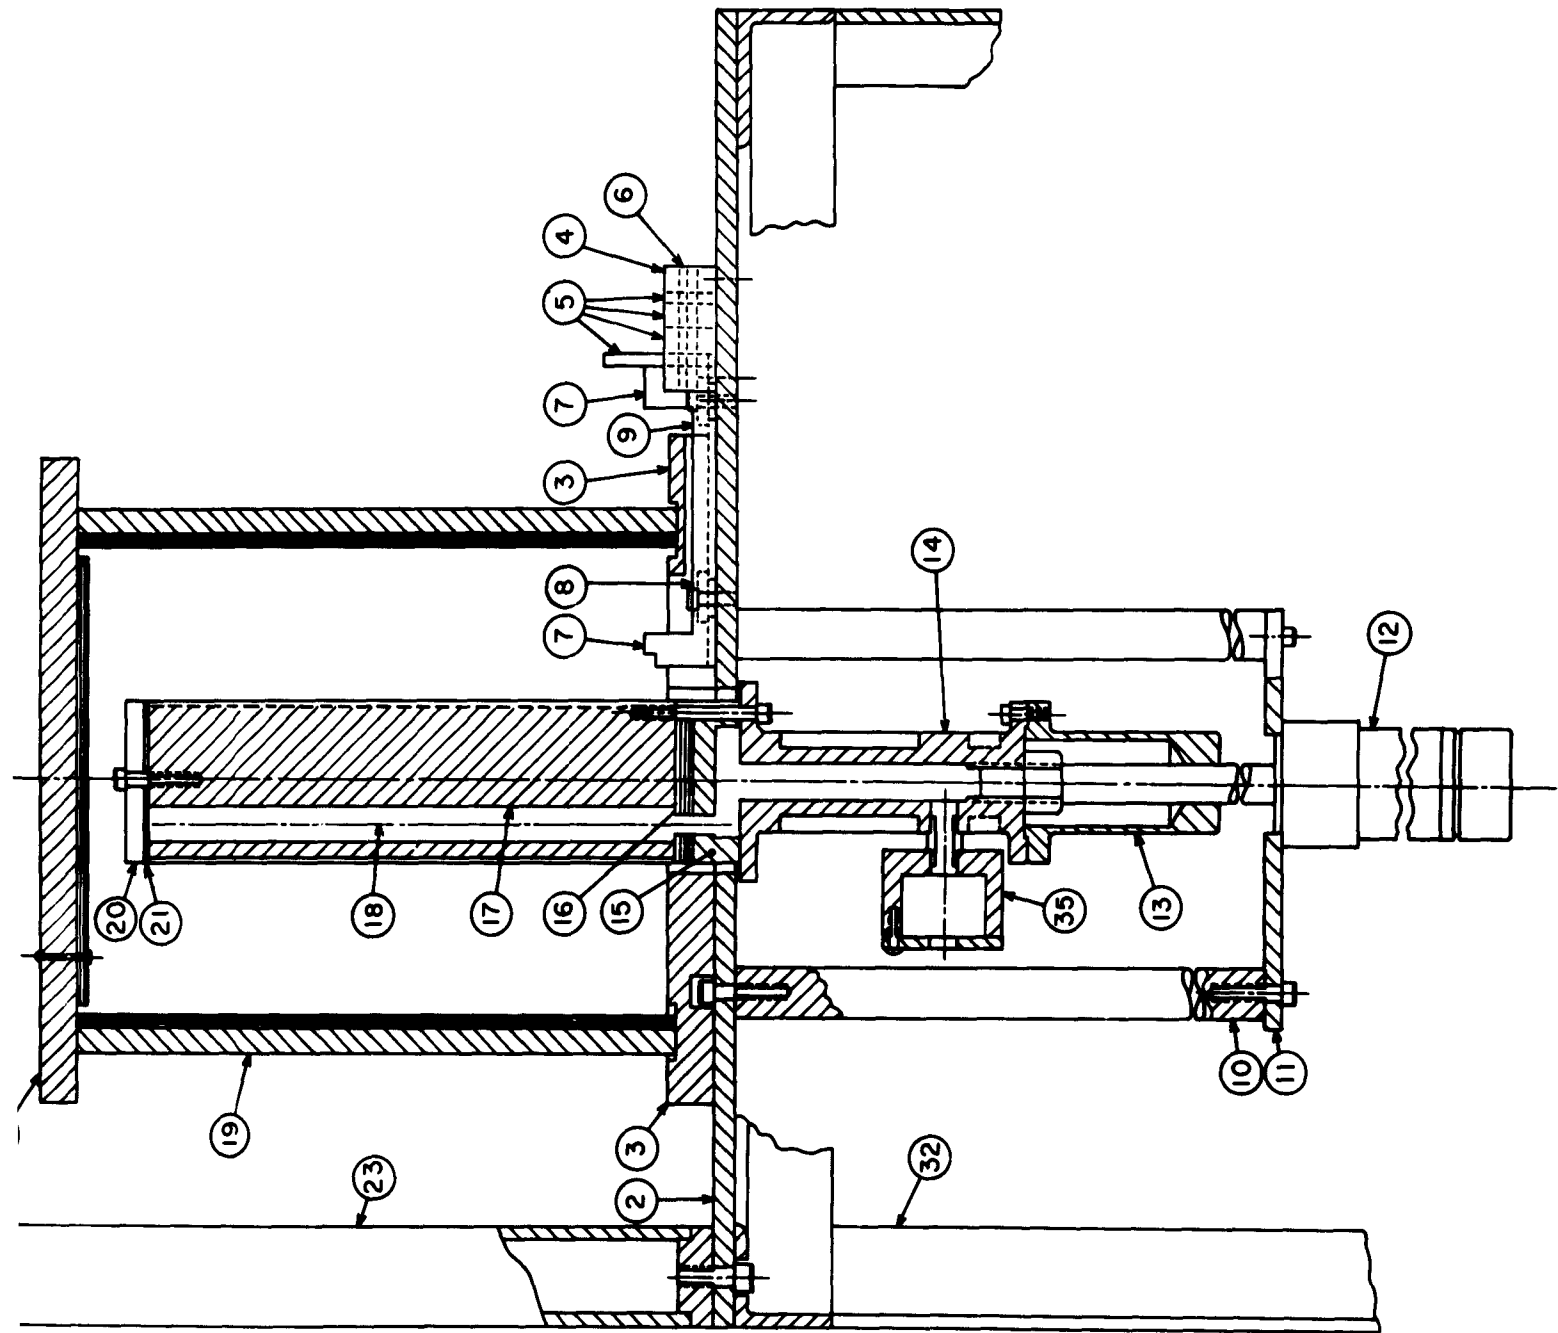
SHRINK FIT ASSEMBLY DEVICE
